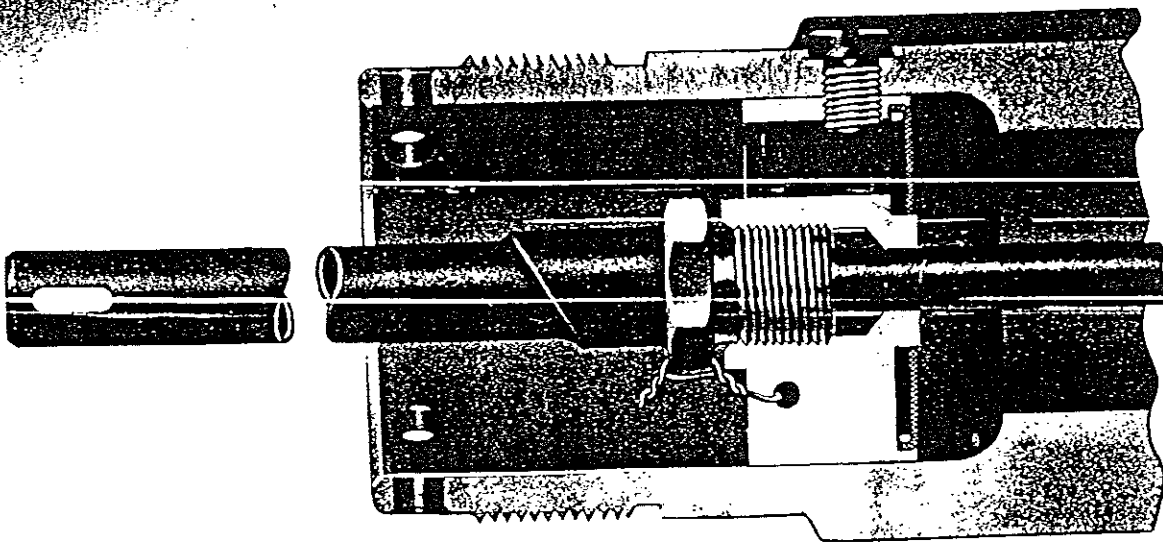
Oil Supply Pipe Installed in Propeller Shaft
